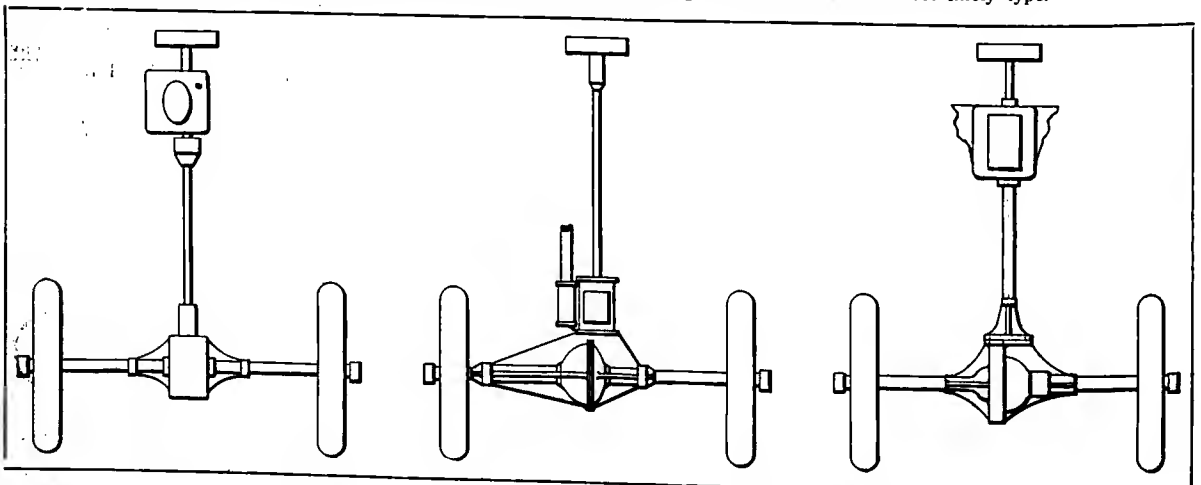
Ordinary placing of the gear-set. Fig. 9.—Transmission grouped about rear axle. Fig. 10.—Elimination of the torsion rod.
